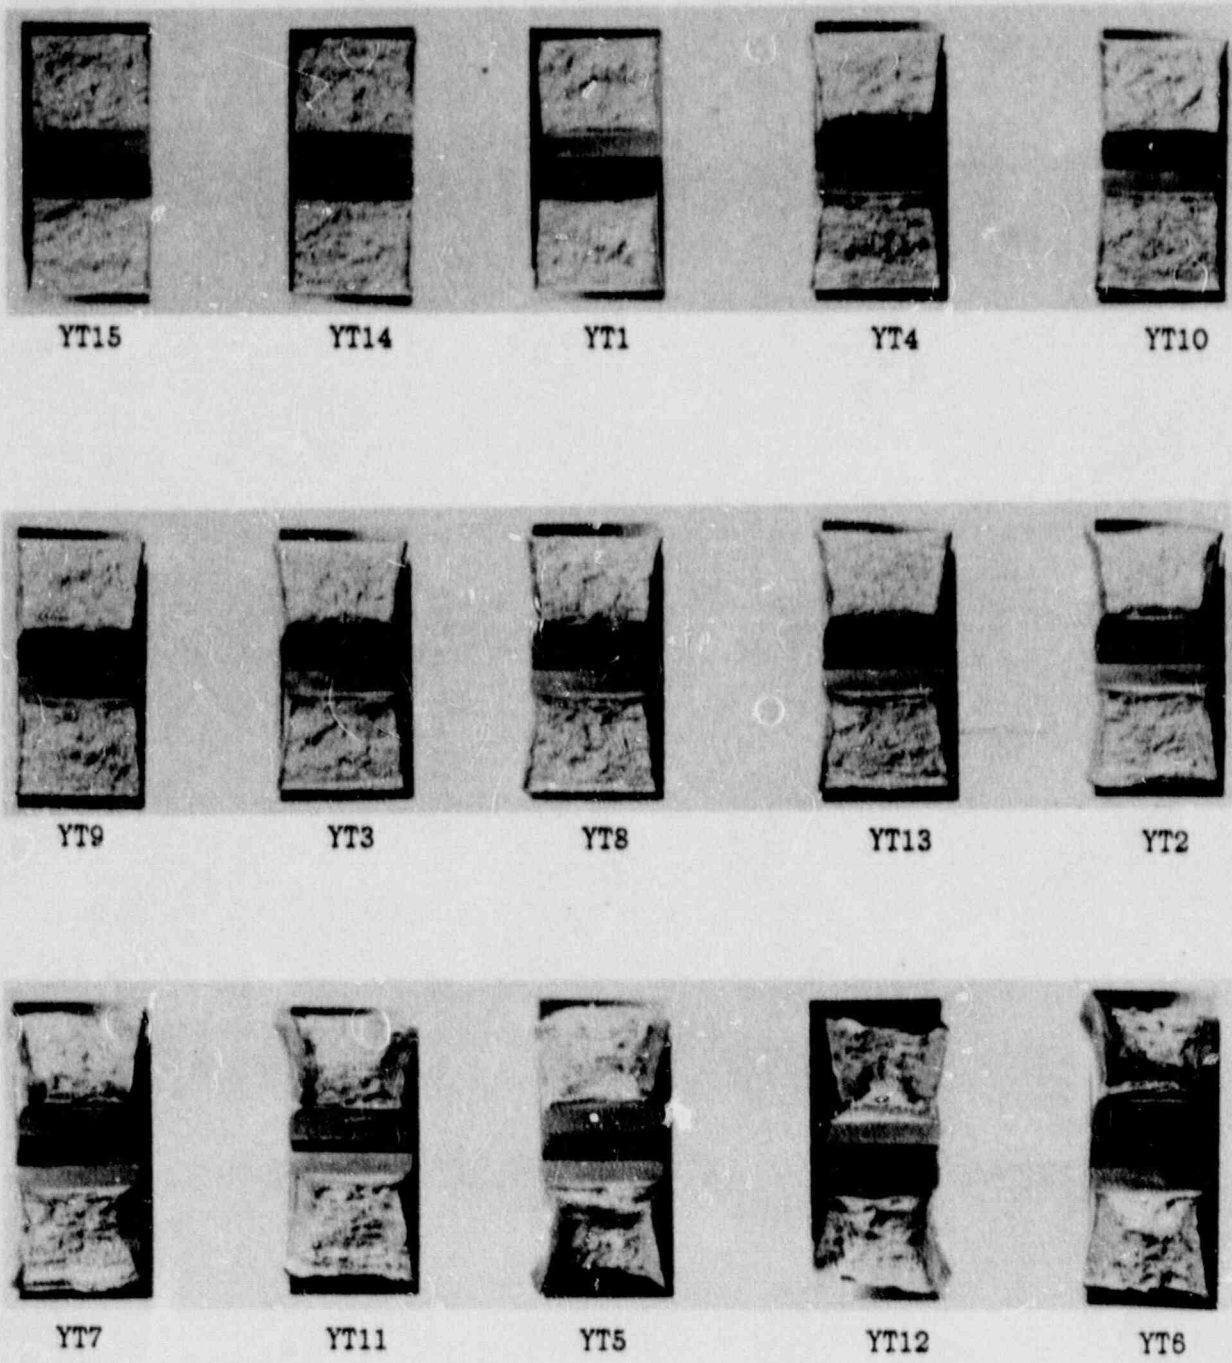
Charpy Impact Specimen Fracture Surfaces for Byron Unit 2 Reactor Vessel Shell Forging MK24-3 (Axial Orientation)
